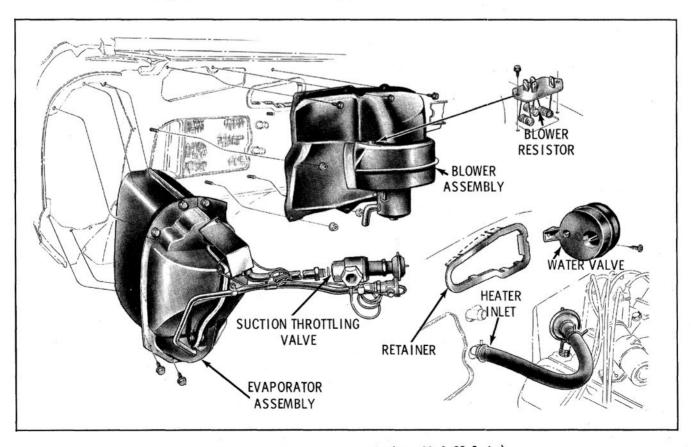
Blower Duct Assembly (30 - 31 & 32 Series)
